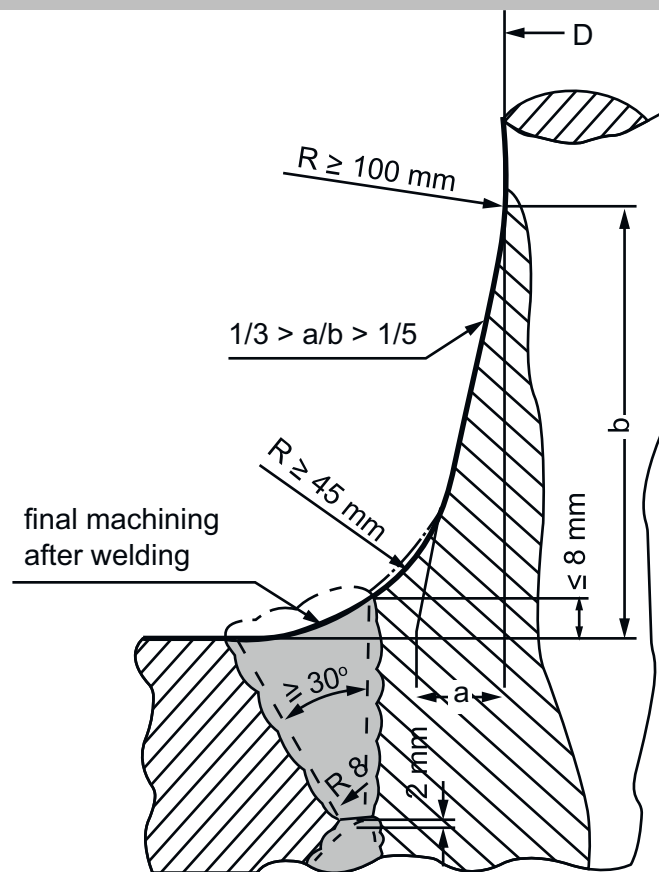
Welded joint between rudder stock and coupling flange
